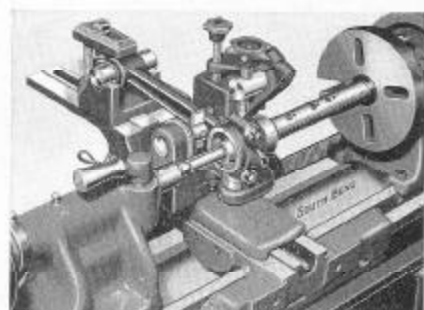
Boring a Rebabbitted Connecting Rod in the Lathe
